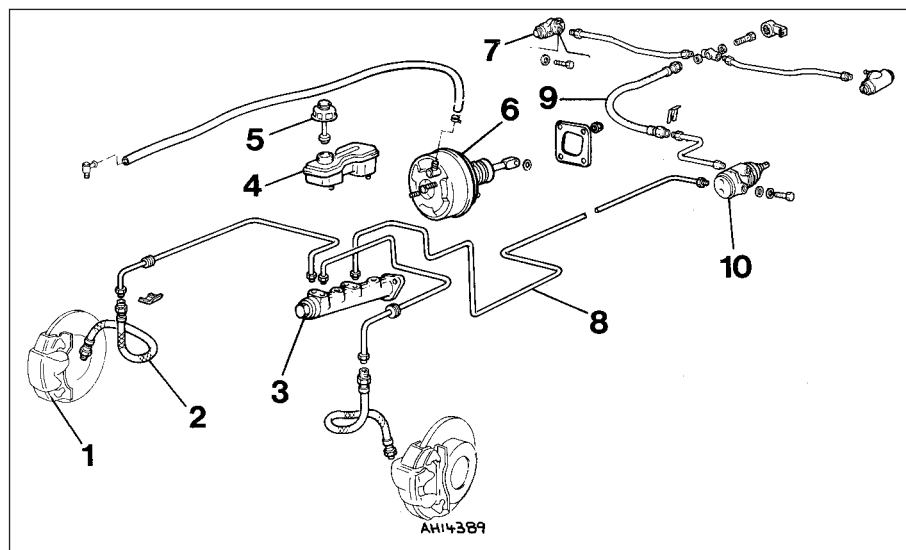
Components of the braking system (LHD shown) (Sec 1)
